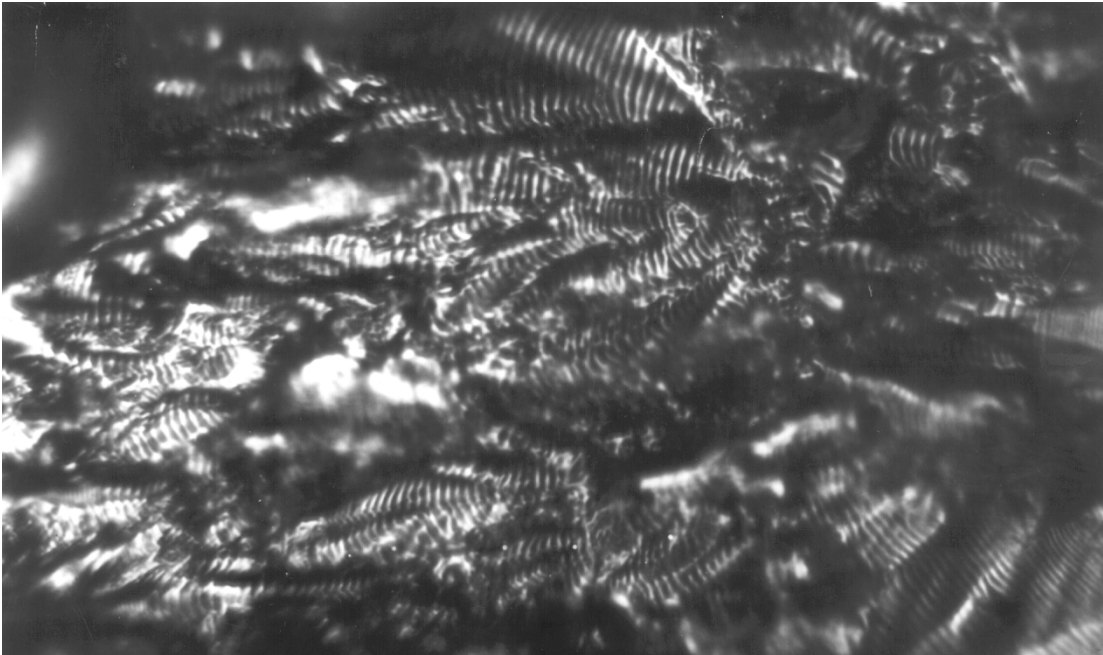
Fatigue Crack Surface View in D16T Material to Illustrate that Fatigue Grooves Are not always Arranged Continuously (optical fractogram X2000)
